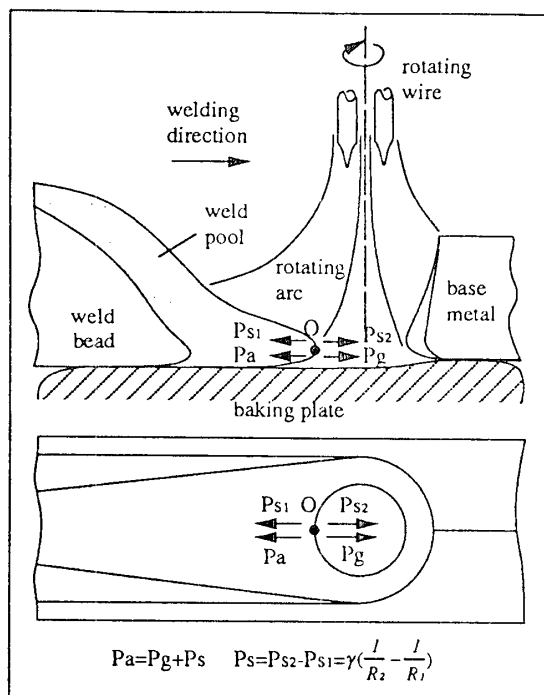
Formation of the weld bead in high current and high speed rotating arc welding process
